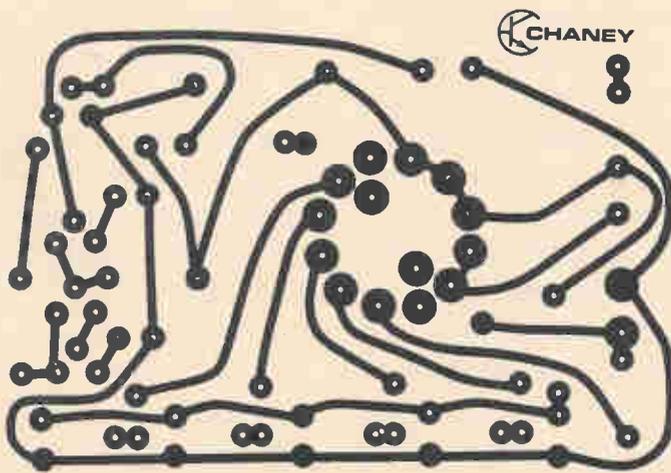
Compare your PC board to this full-size foil pattern to check for solder bridges.
